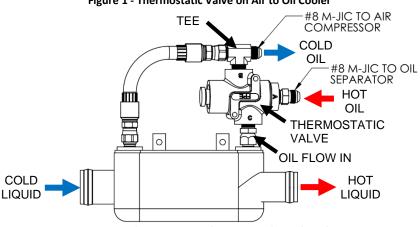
Thermostatic Valve on Liquid to Oil Cooler
